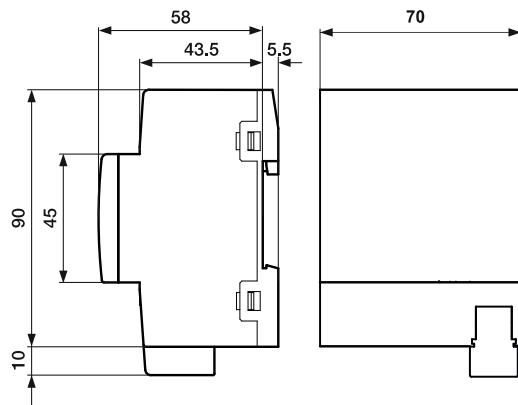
Dimensions of 4-fold blind actuator MDRC (specifications in mm)
